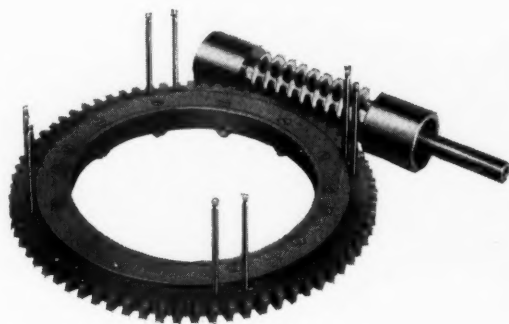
The reduction gearing: a worm and a four-layer worm-wheel
